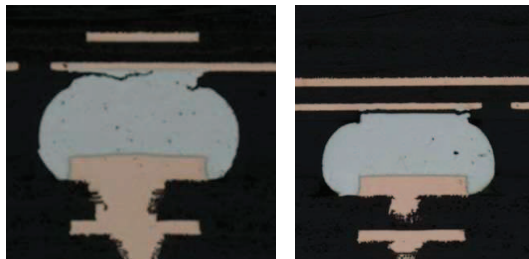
To the left, Cross section of FC-CSP package DC chain. Cross section after 579 cycles. To the right a crack in the IMC in CC. Cross section after 1000 cycles.
